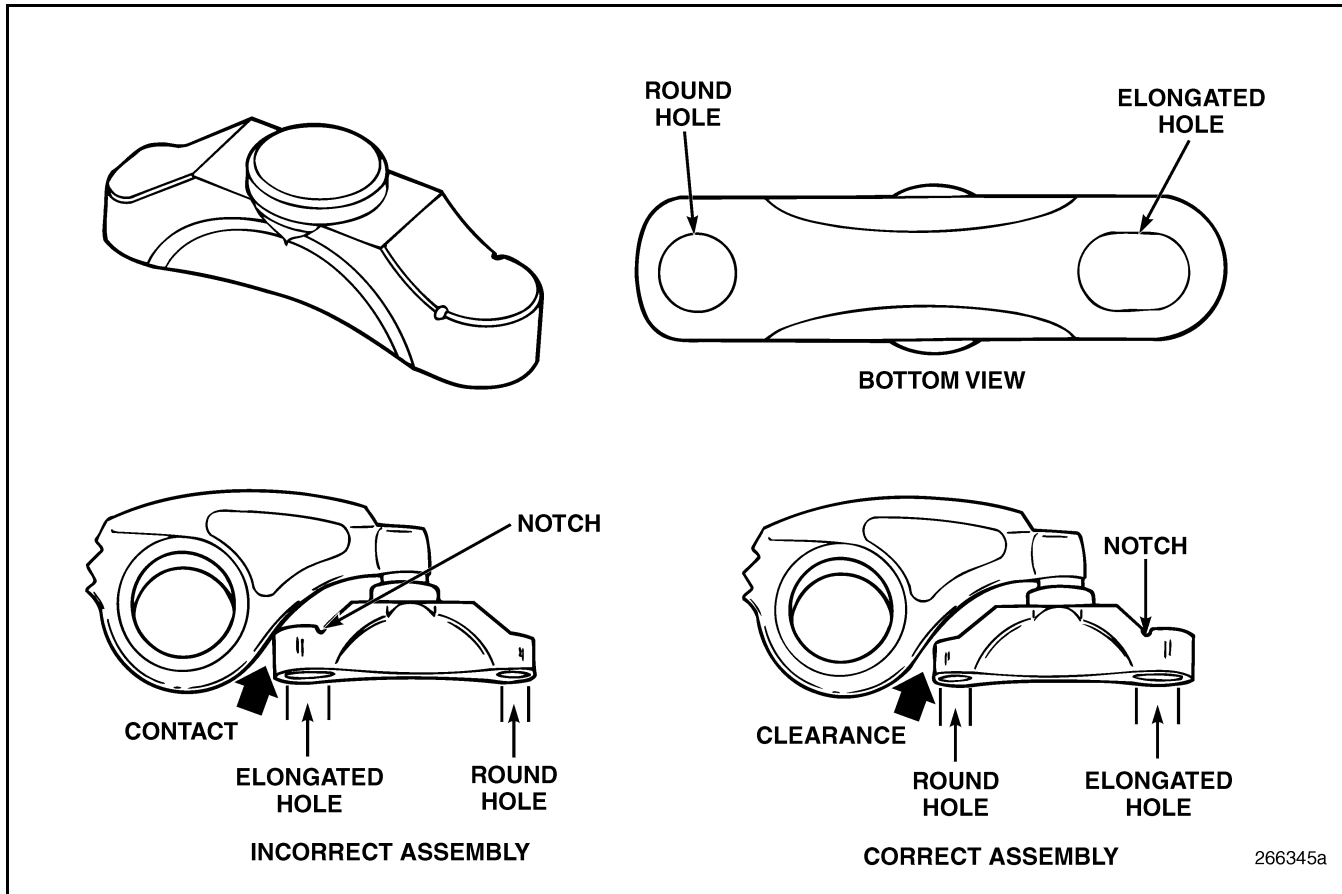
Proper Assembly of the Pinless Valve Yoke
